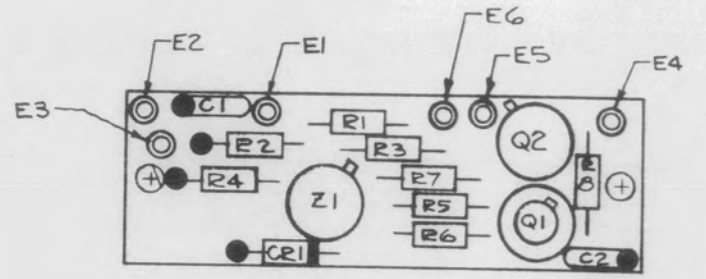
VFO Assembly A9, Schematic and Assembly Drawings (Sheet 2 of 2)
